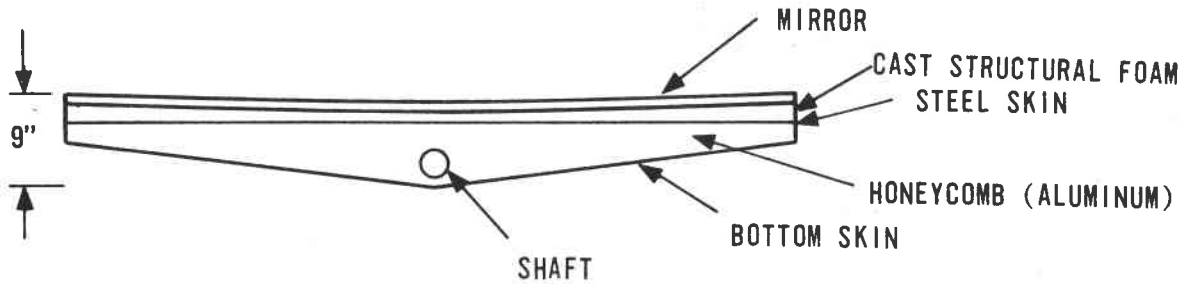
A. Aluminum Honeycomb 125 by 125 Inch Mirror Module
